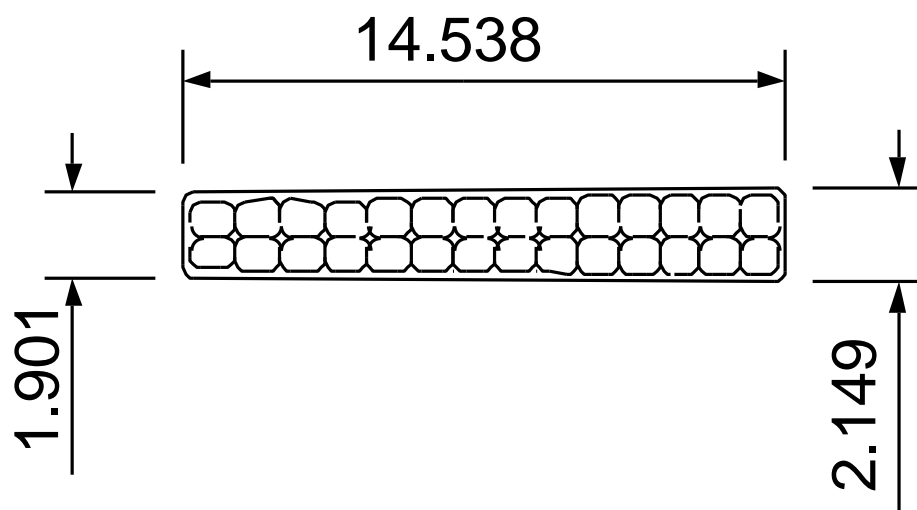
Dimensions of the insulated 28-strand cable [units in mm].
